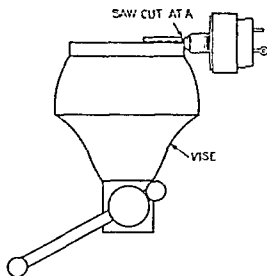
Cutting the volume-control shaft for a push-on knob.
